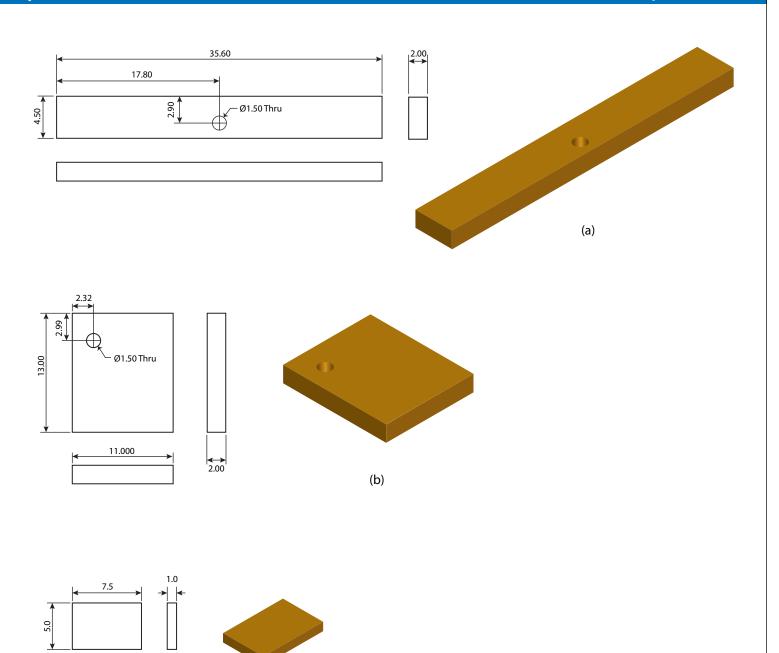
(a) Secondary FET copper heat-spreader, (b) Primary FET copper heat-spreader, (c) Primary side copper mechanical spacer
